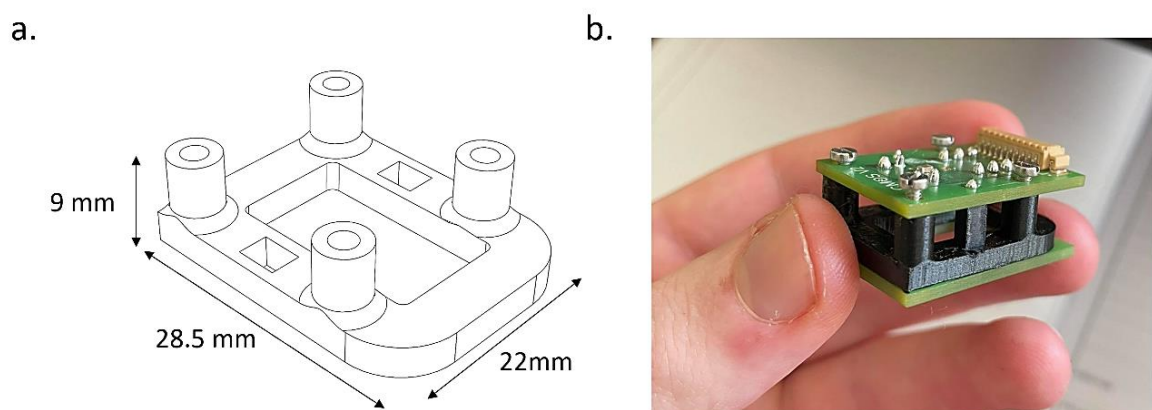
Design of spectrometer and UV LED board spacers. (a) Dimensioned drawing of spacer design. (b) Black PLA 3D printed spacer and assembled stacked boards.
